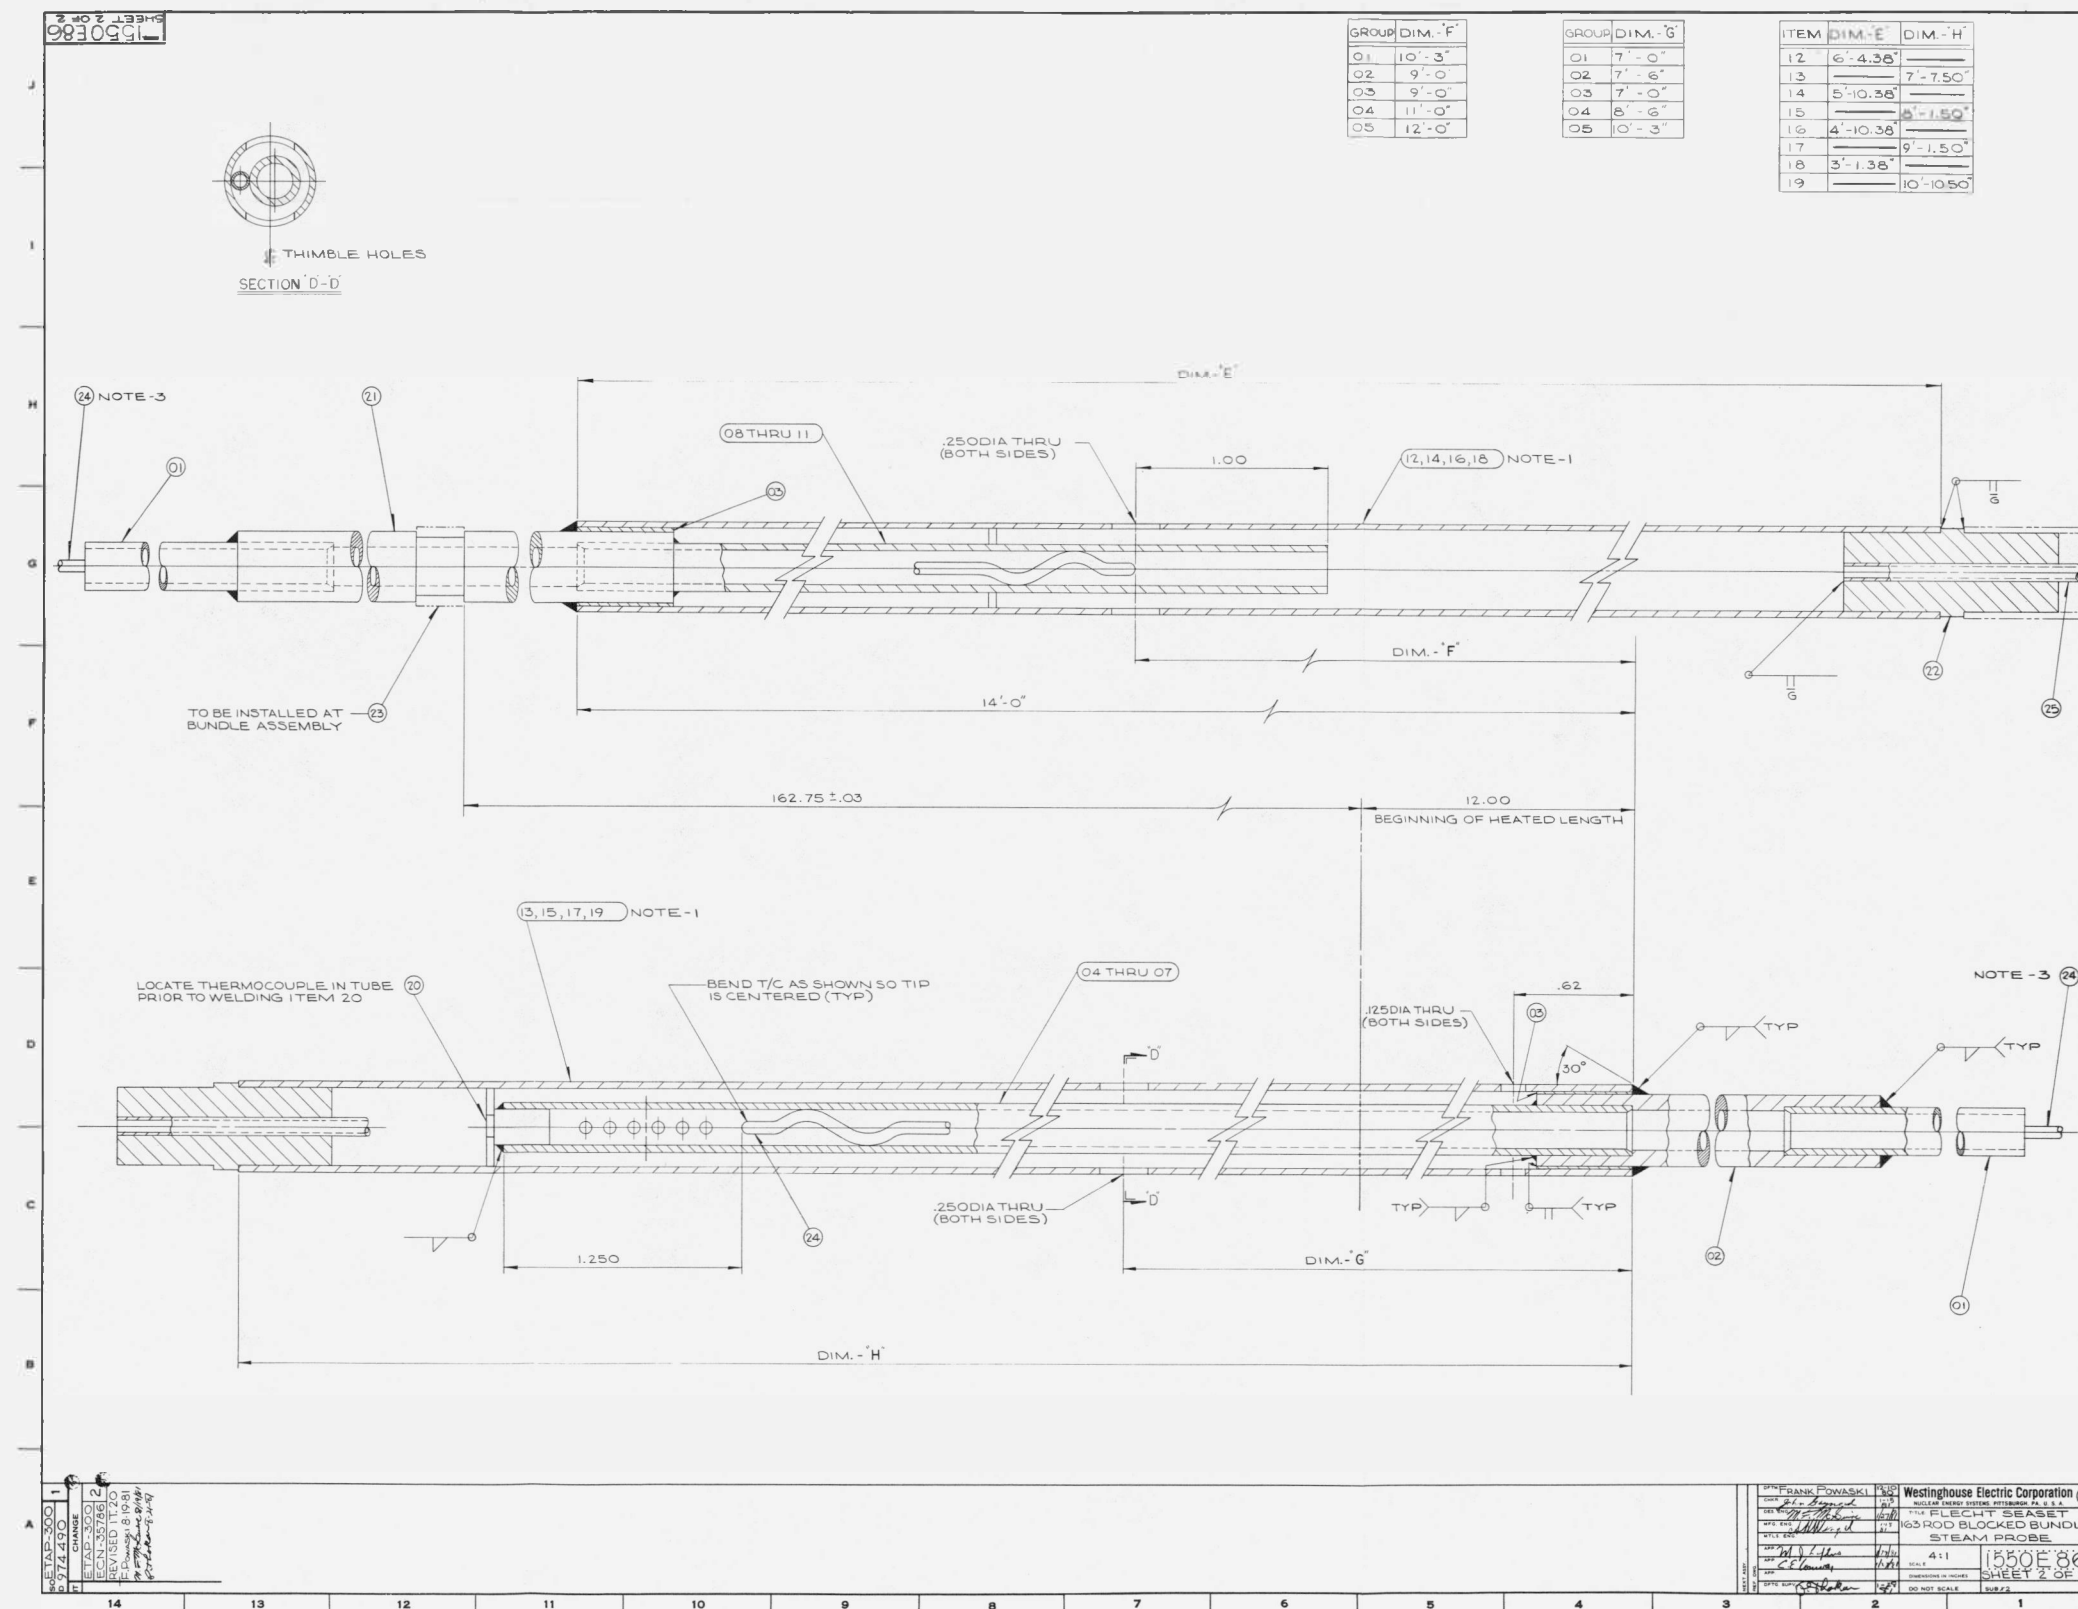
FLECHT SEASET 163-Rod Blocked Bundle Steam Probe (sheet 3 of 4)
